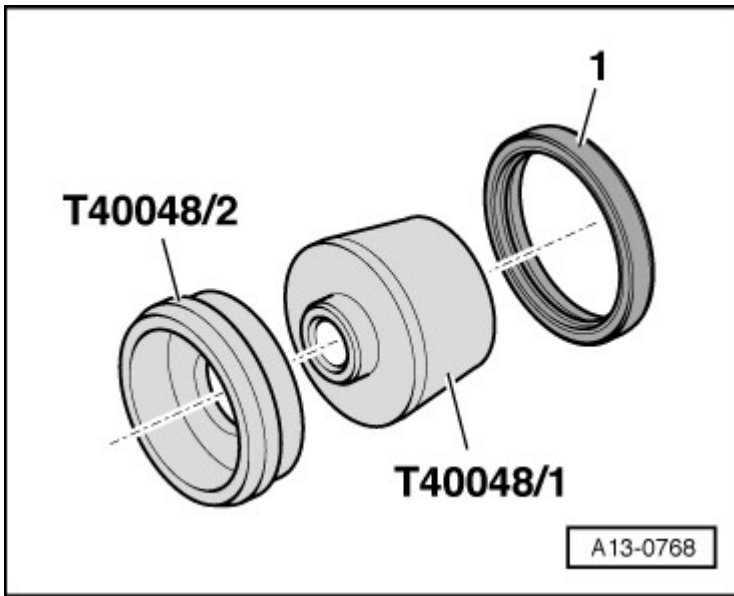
Inserting Assembly Device T40048/1 Onto Pull Sleeve T40048/2 And Slide Seal Onto Pull Sleeve
